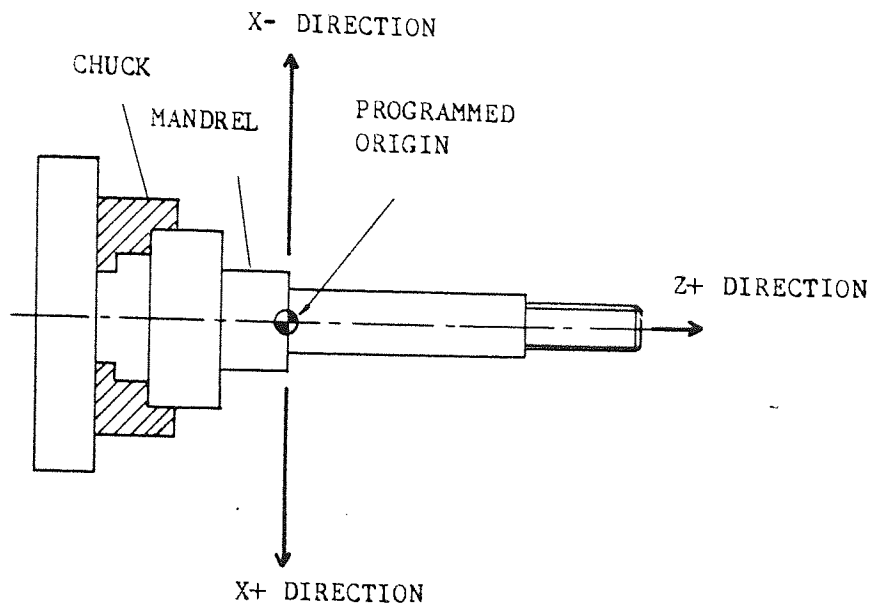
COORDINATE SYSTEM FOR THE CNC LATHE
